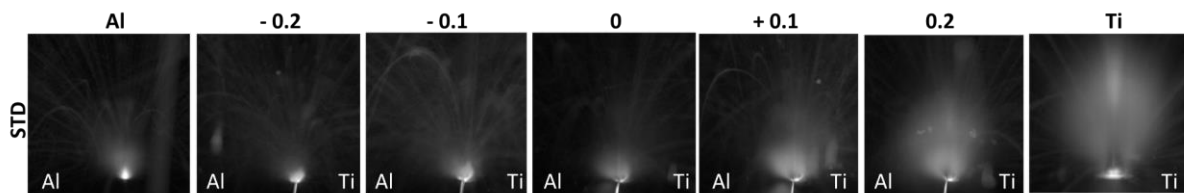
STD images for standalone, dissimilar welding plumes in front view with 3 kW at 3 m/min.
